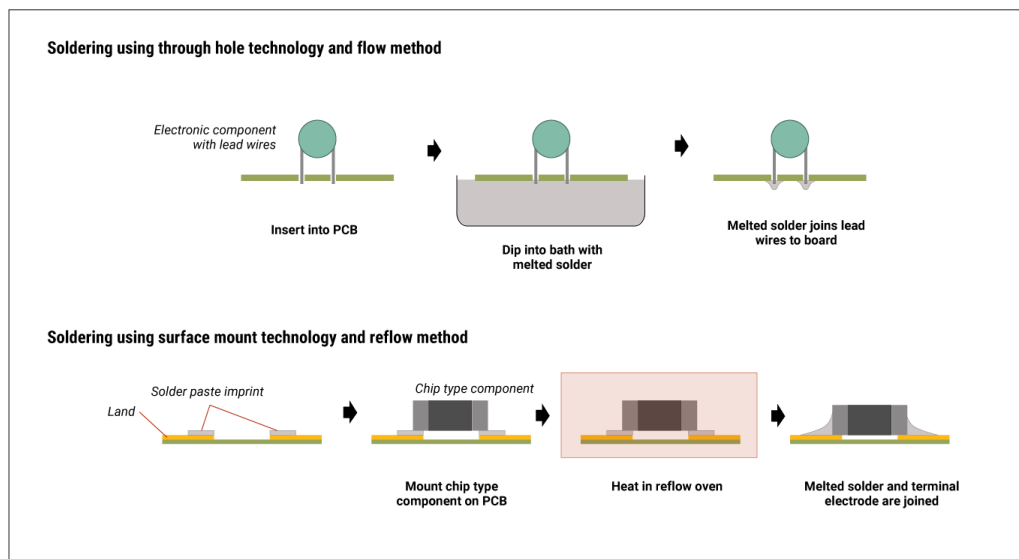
Through-hole flow soldering and surface mount reflow soldering
